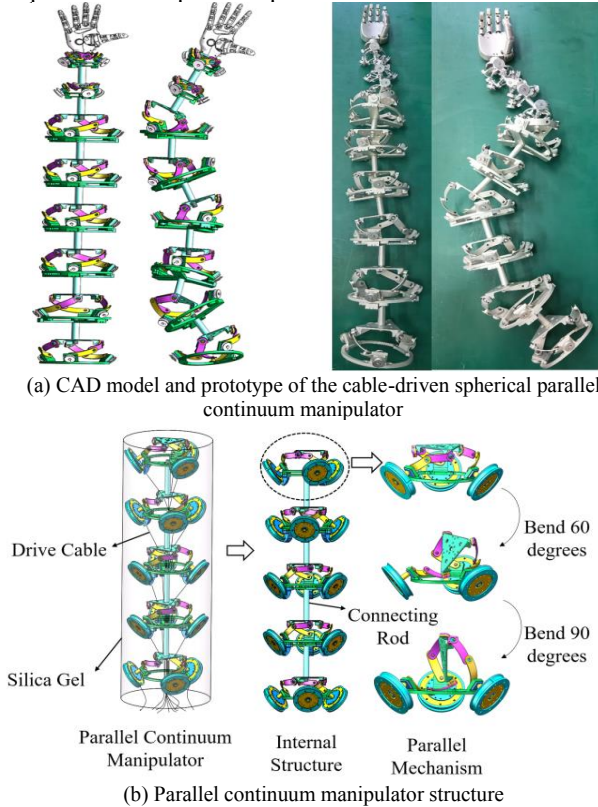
Cable-driven spherical parallel continuum manipulator.
